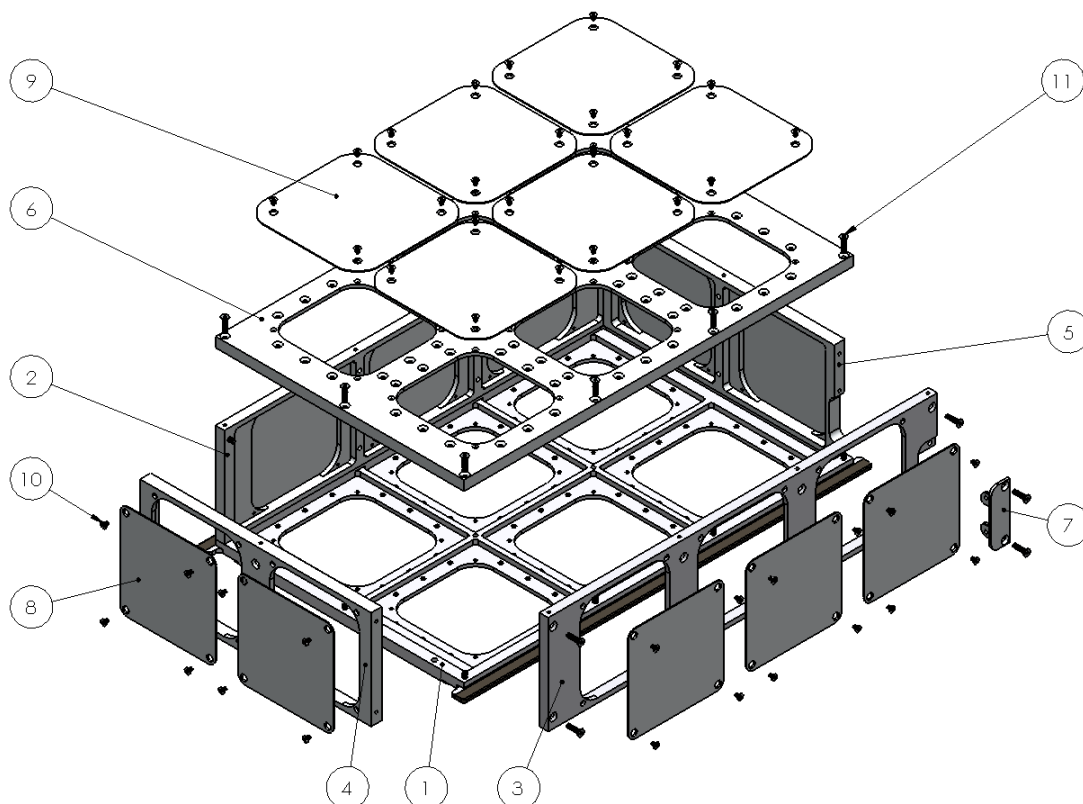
SUPERNOVA™ CHASSIS ASSEMBLY
